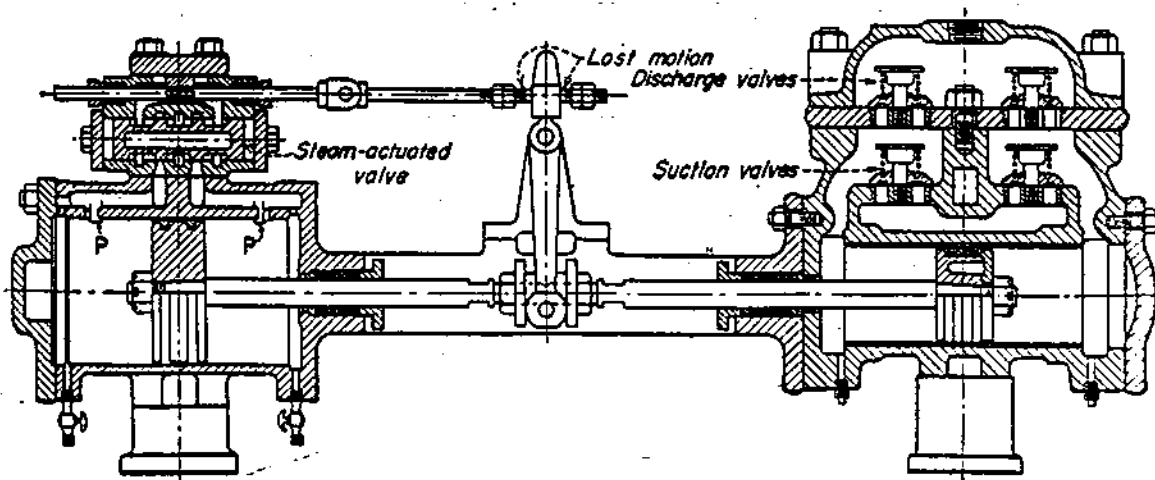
Cross section through simplex direct-acting pump showing "D"-type pilot valve seating on steam-chest cover and piston main valve.
